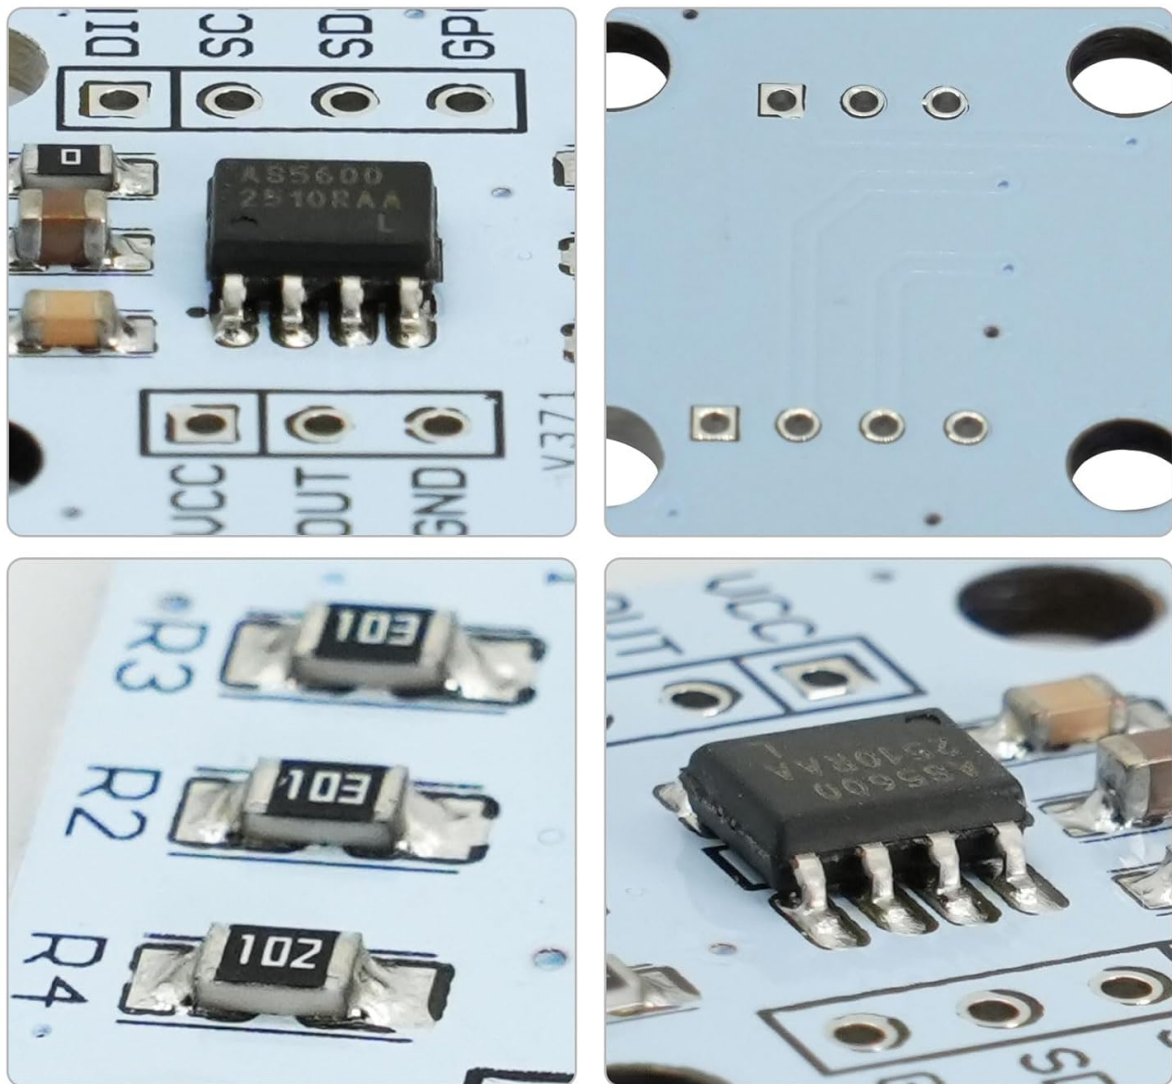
Detailed view of the AS5600 module components, useful for identifying connection points.
